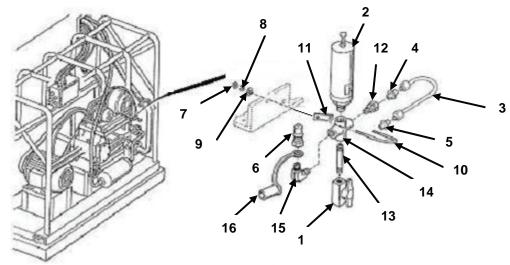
Air Compressor (P/N 02141-001) Relief Valve
